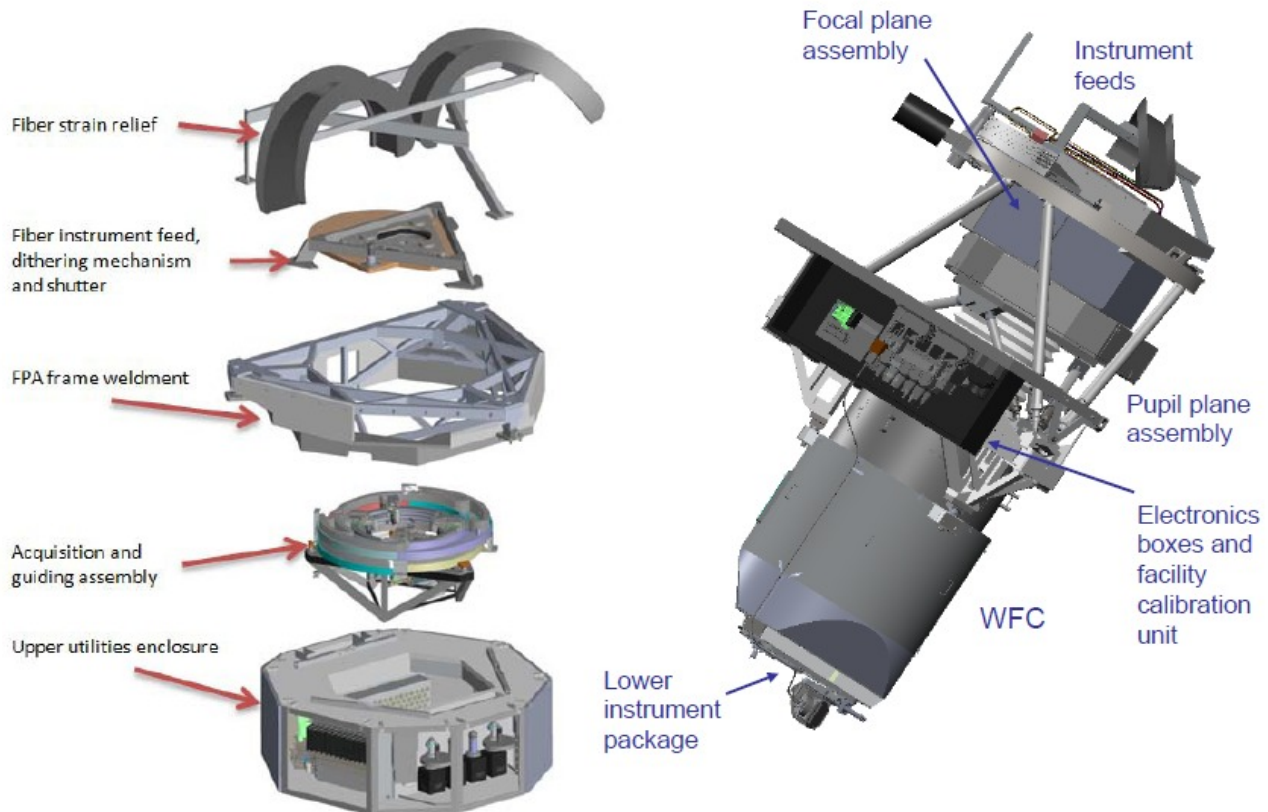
Renderings of the PFIP. On the right the full assembly is shown with major sub-assemblies indicated. On the left is an exploded view of the FPA showing its major components. The FPA contains most of the complexity of the instrument, including the acquisition and guiding (AG) assembly with guide probes and wavefront sensors.
